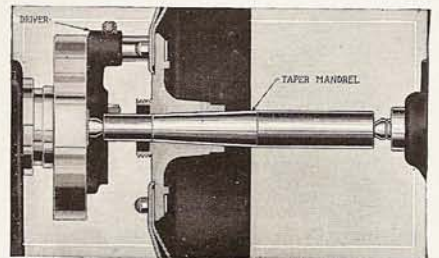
Rear Wheel of Automobile Mounted on Self-Centering Taper Mandrel.
